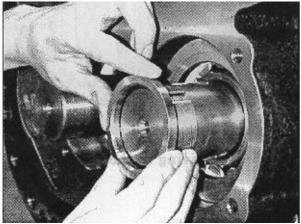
Mounting the Thrust Bearing Adjust Washer.
